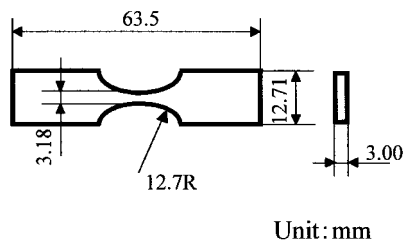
Dimensions of ASTM-D1822 Type S tension-impact specimen.
